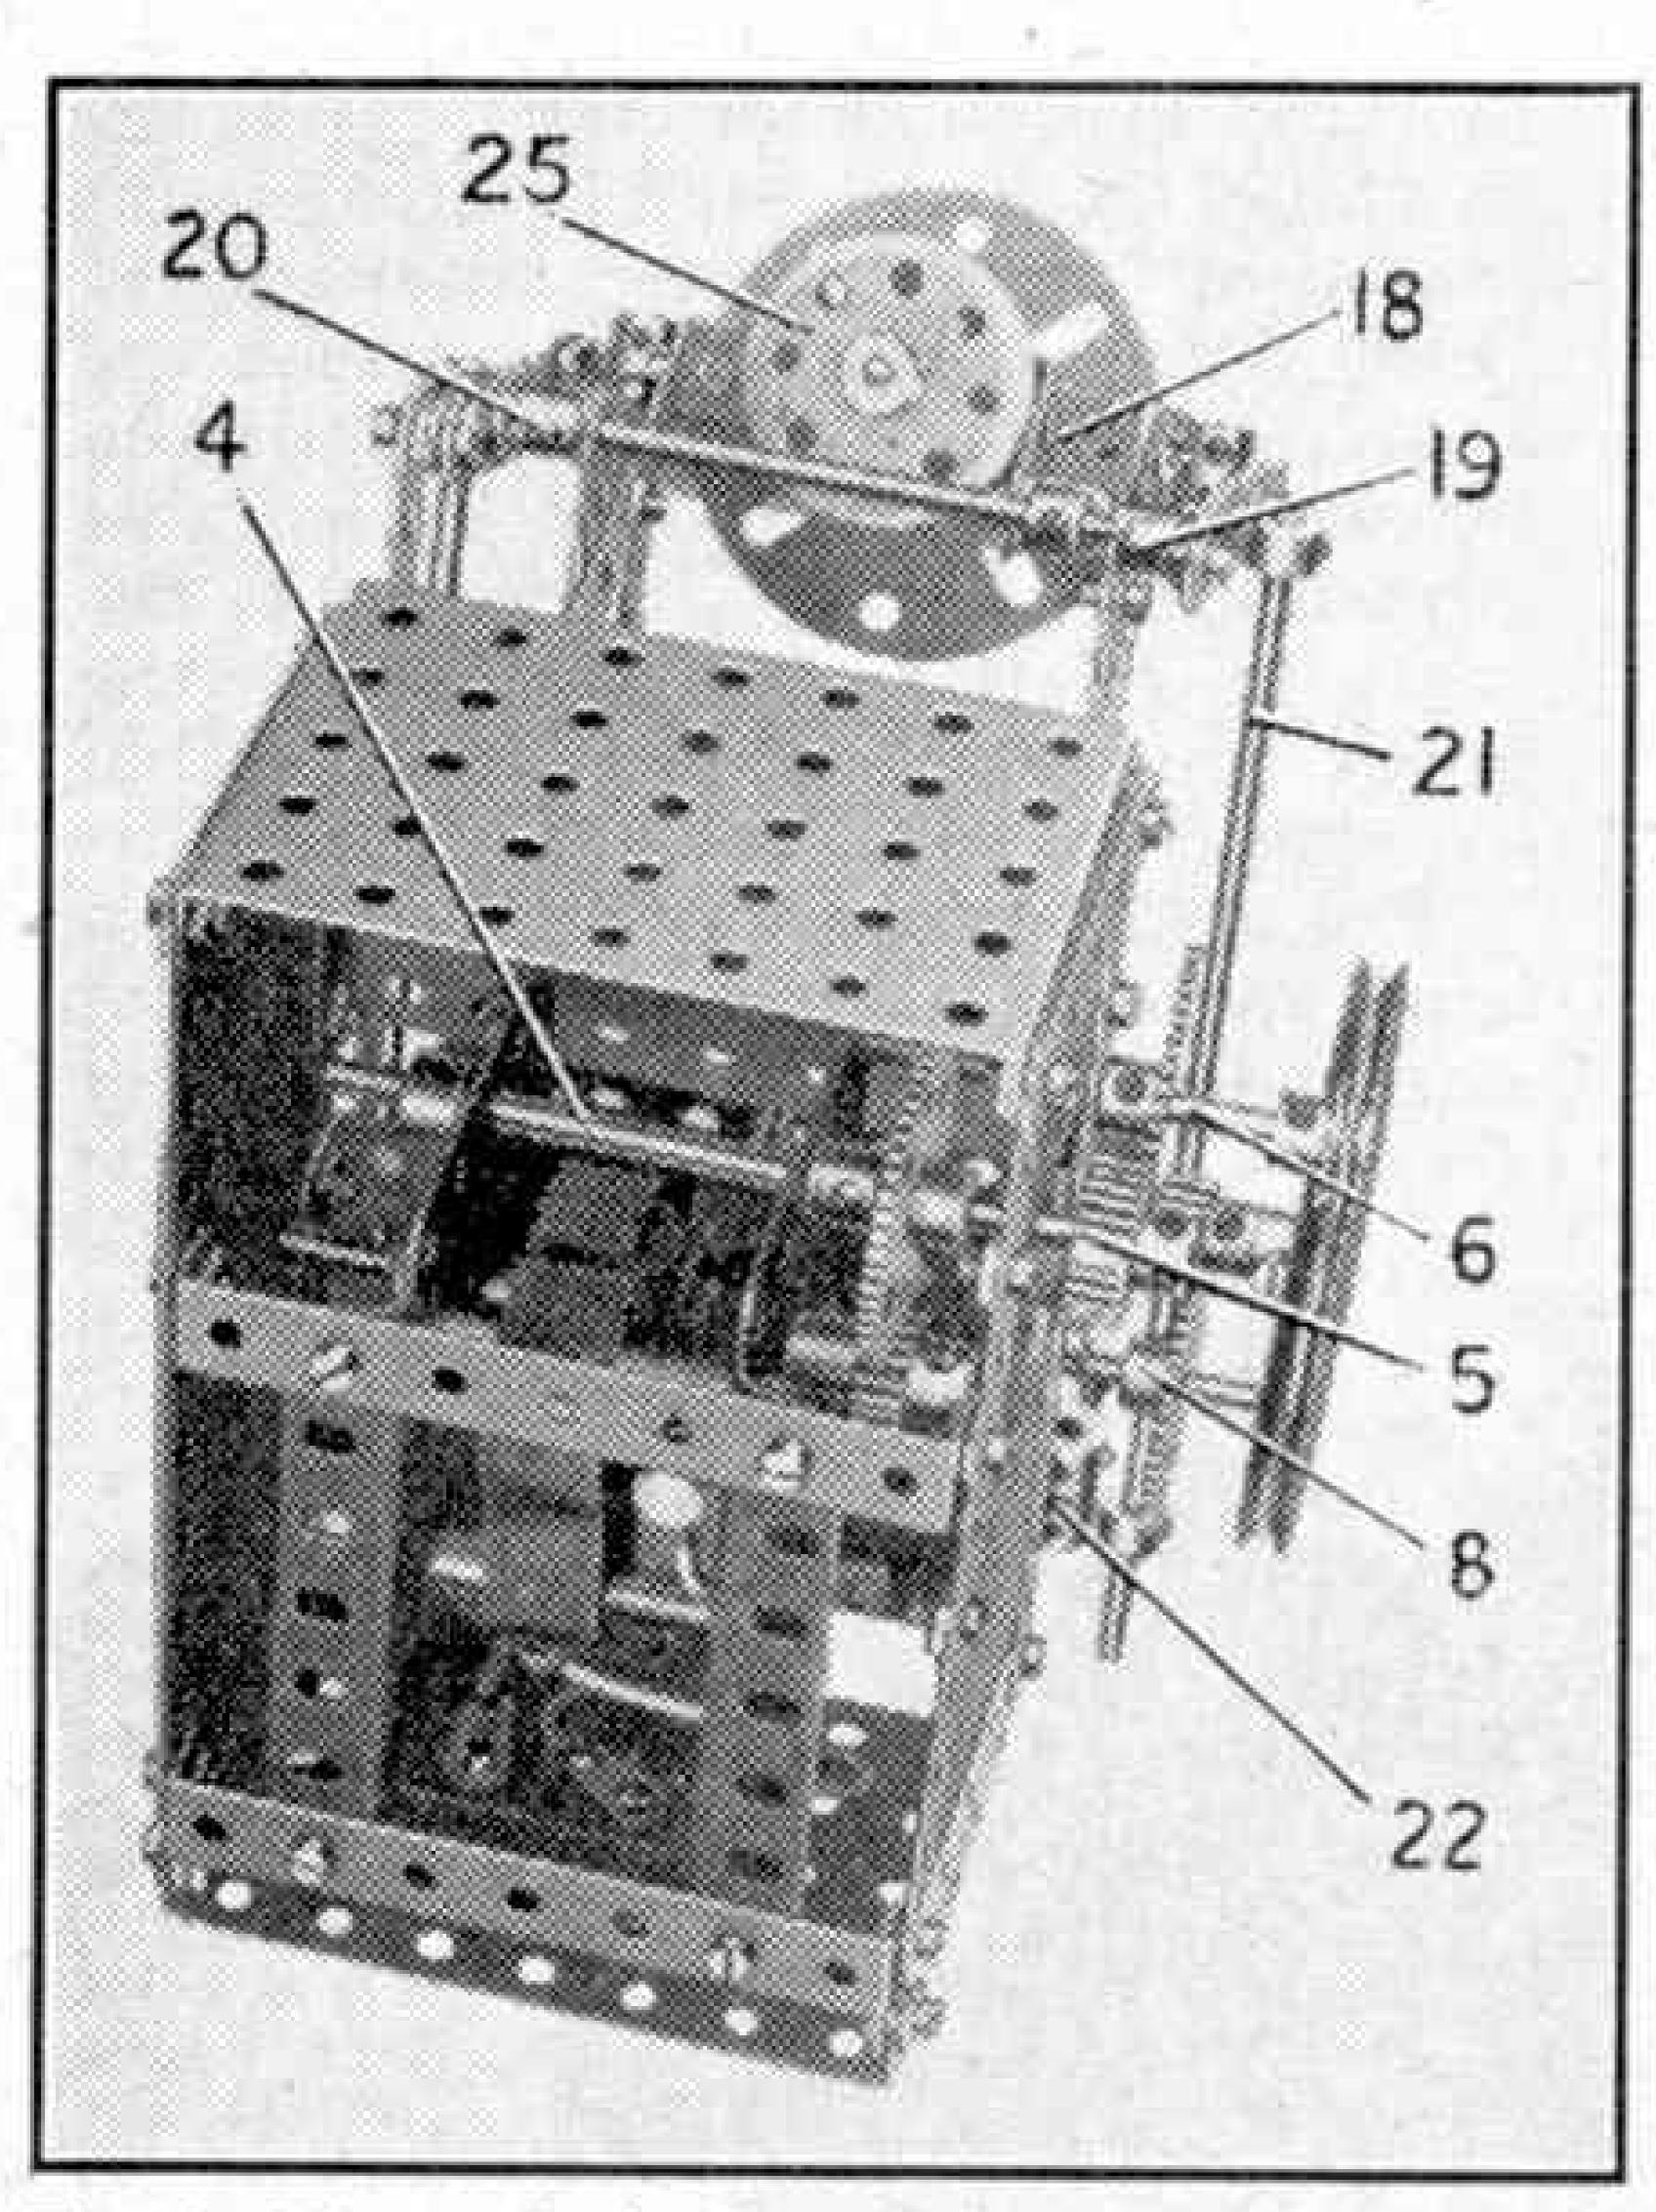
The method of mounting the E20R Electric Motor is seen in this underneath view of the printing machine.
